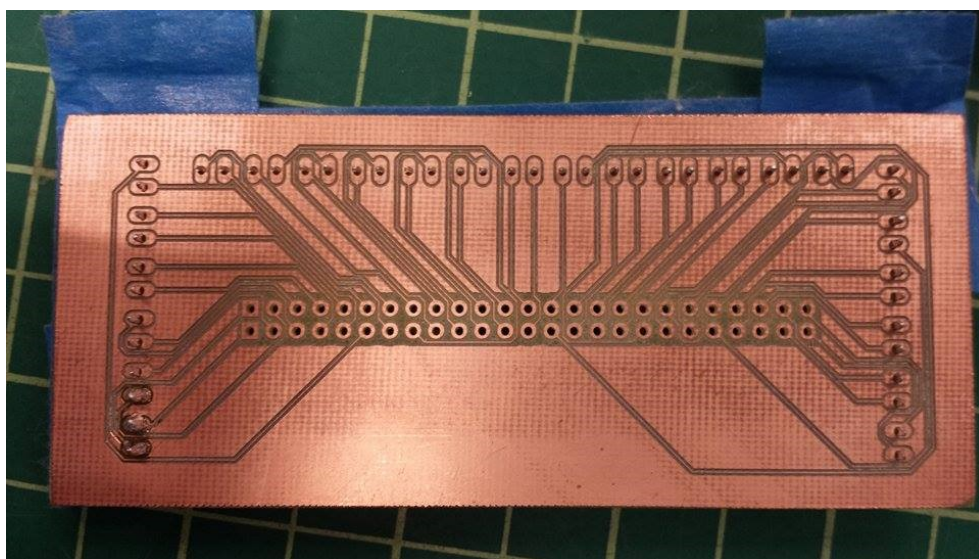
The 50 pin Breakout Board for the Sensoray 826 I/O card
